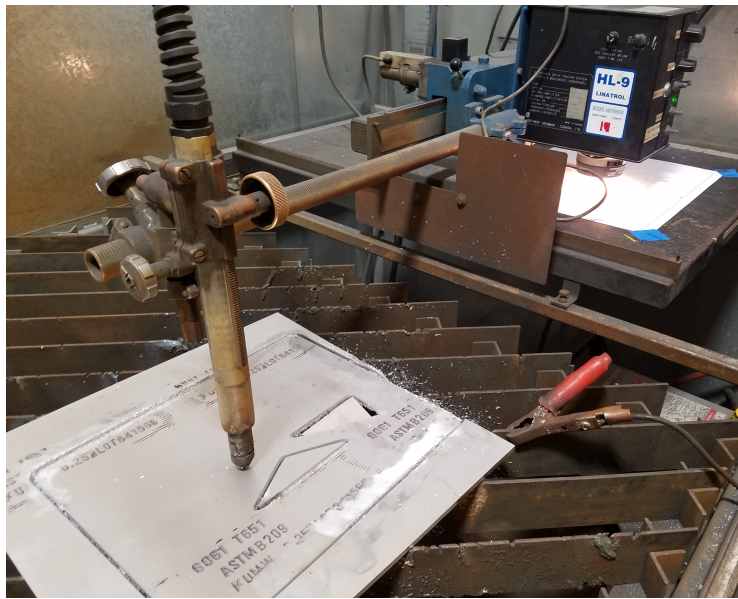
Optical plasma cutter. On the right is the optical sensor with the 1:1 drawing taped down underneath. On the left is the cutting torch.
